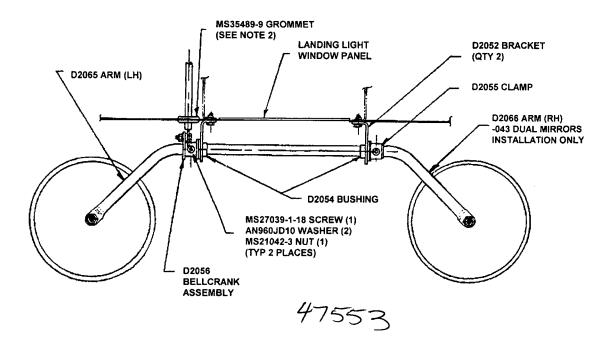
View A: Looking Aft. (D206-558-043 Mirror Shown)
